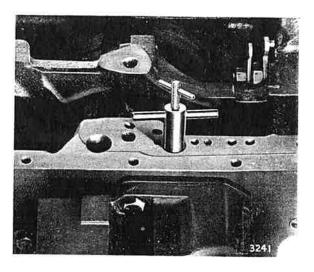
Removing the rear pump outlet tube (Extractor Tool Part No. CWG45).
